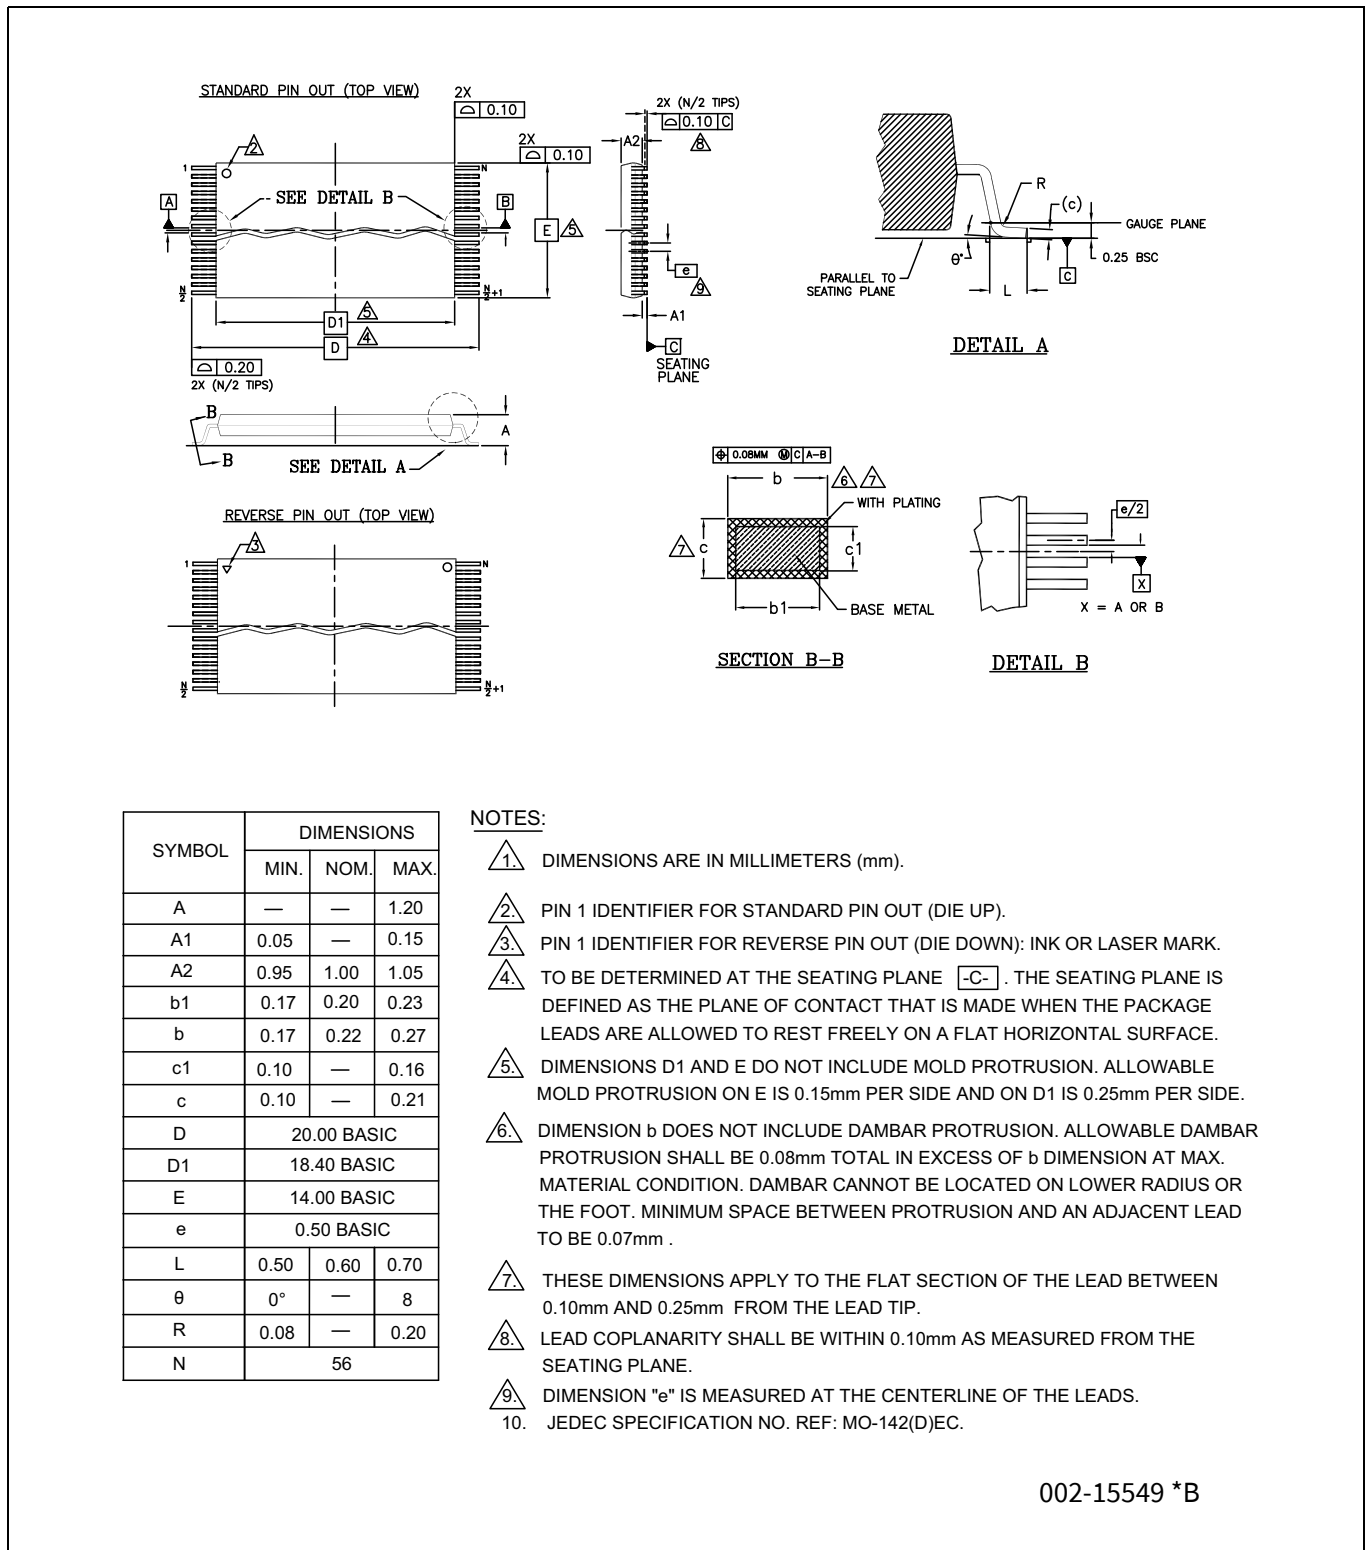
56-pin TSOP (18.4 × 14.0 × 1.2 mm) package outline, 002-15549
